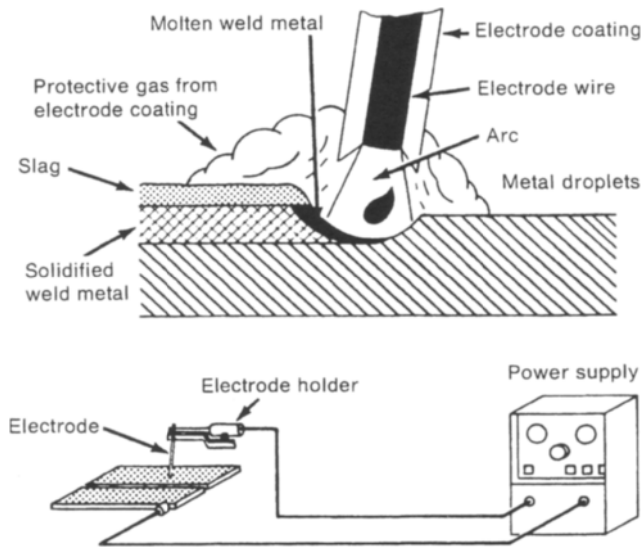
Shielded or manual arc welding. (Reproduced with permission of Nickel Development Institute publication 9002; *Welding of Stainless Steel and Other Joining Methods*.)
